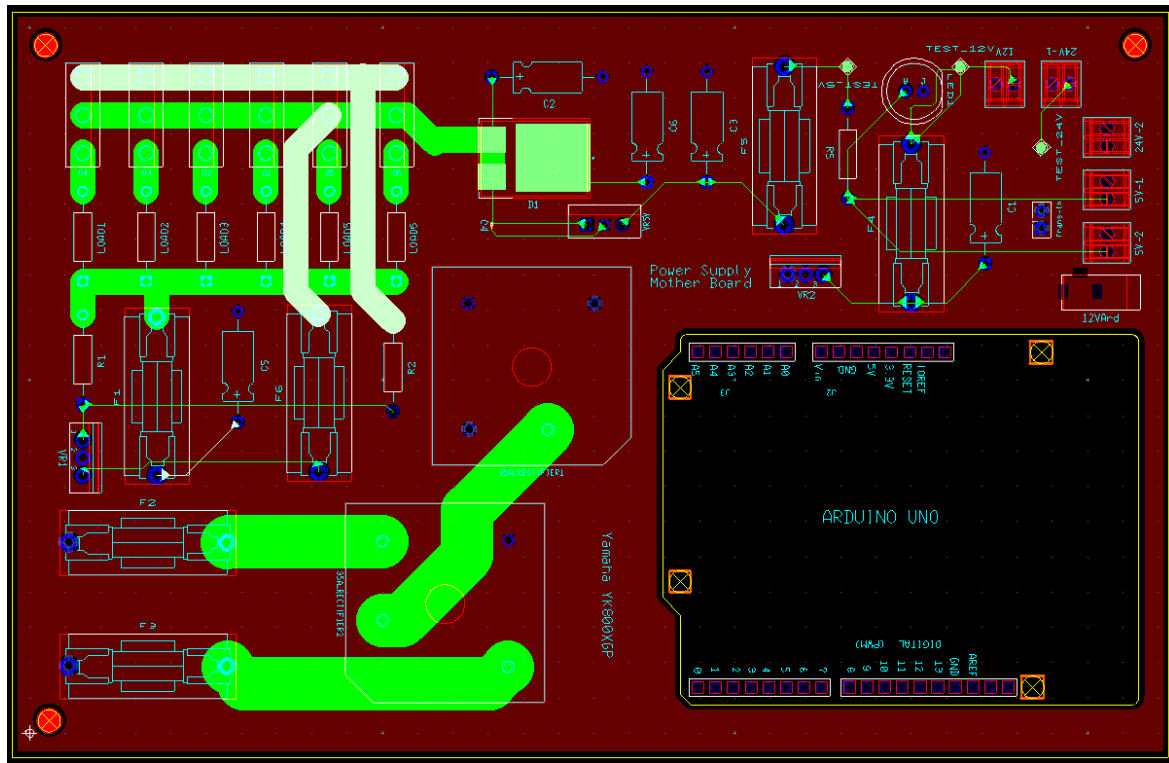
PCB Layout of the Mother Board in Ultiboard 14.2
